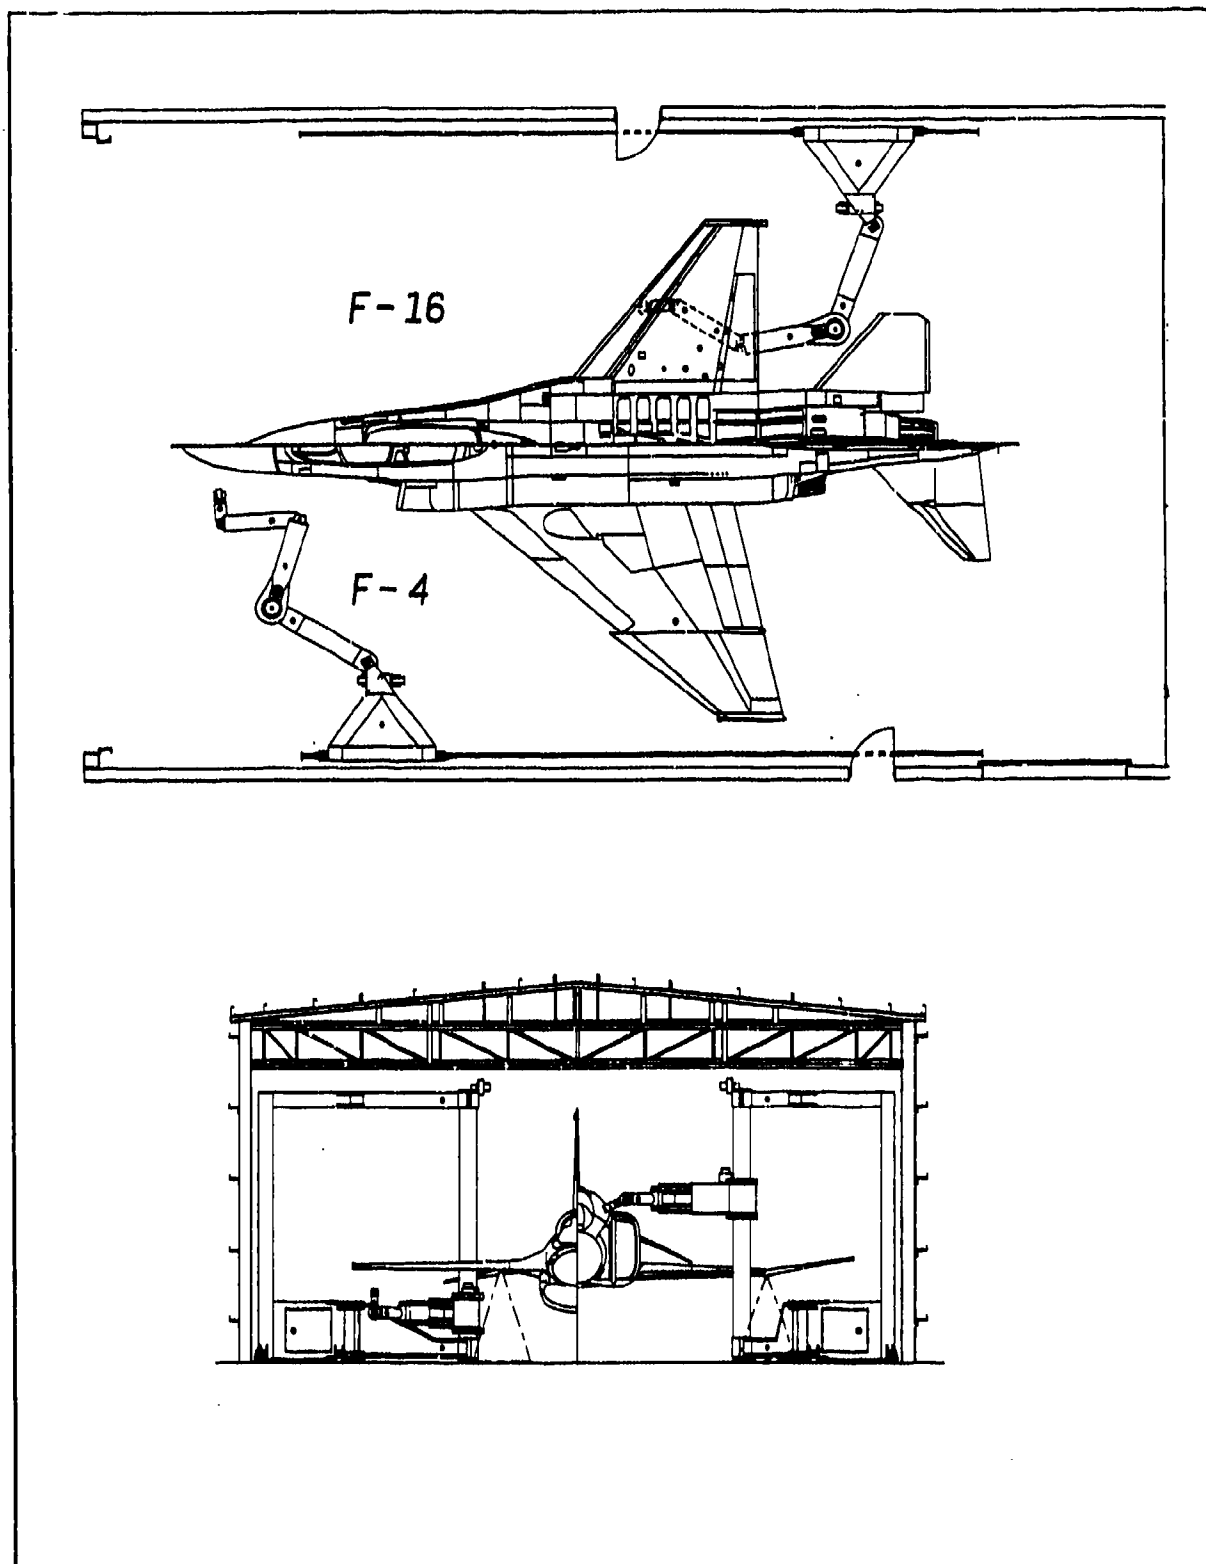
Layout Drawing Showing Positioning of Robots and Aircraft
